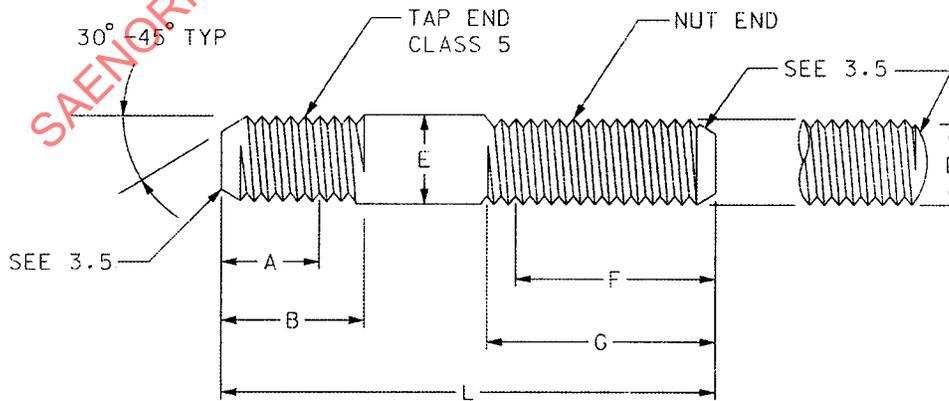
DOUBLE END STUDS—INTERFERENCE FIT TAP END
